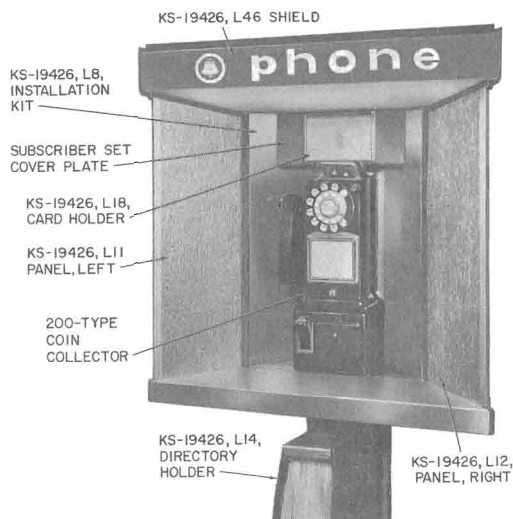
KS-19426 Mounting Using 200-Type Coin Collector
